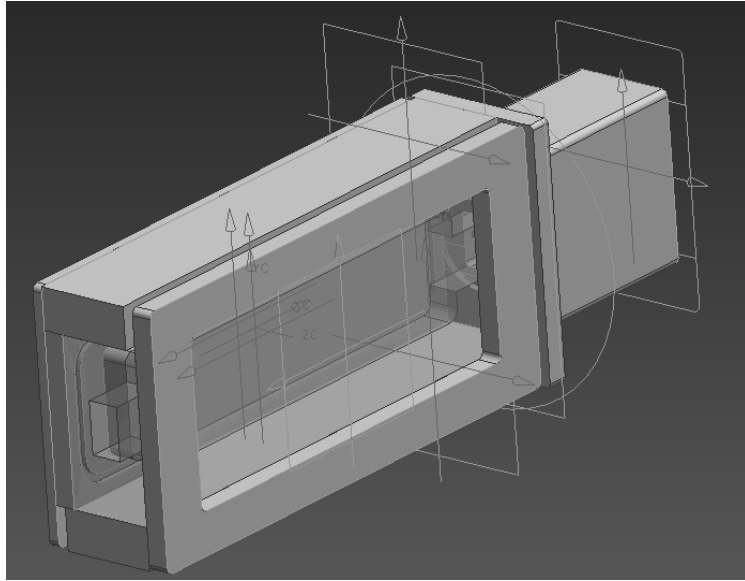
CAD Drawing of the Test Section and the Adaptors.
